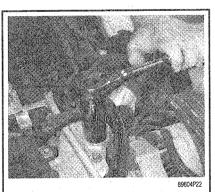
and loosen the sensor using a suitable socket or other drive tool
